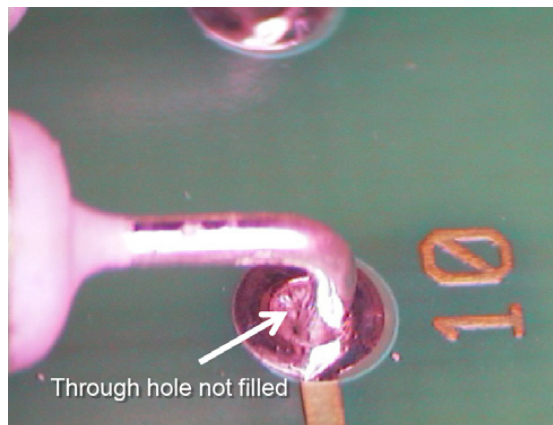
Example of poor wetting seen from the flowed fillet side of the circuit board (Eutectic flux cored solder, joint E10).
